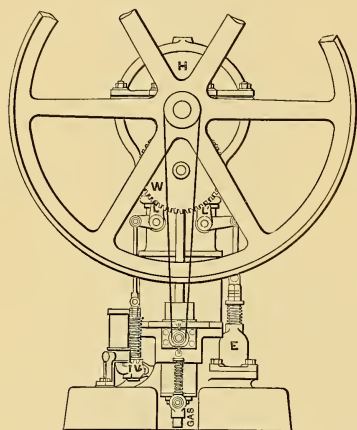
SIDE ELEVATION OF THE PALATINE ENGINE.
